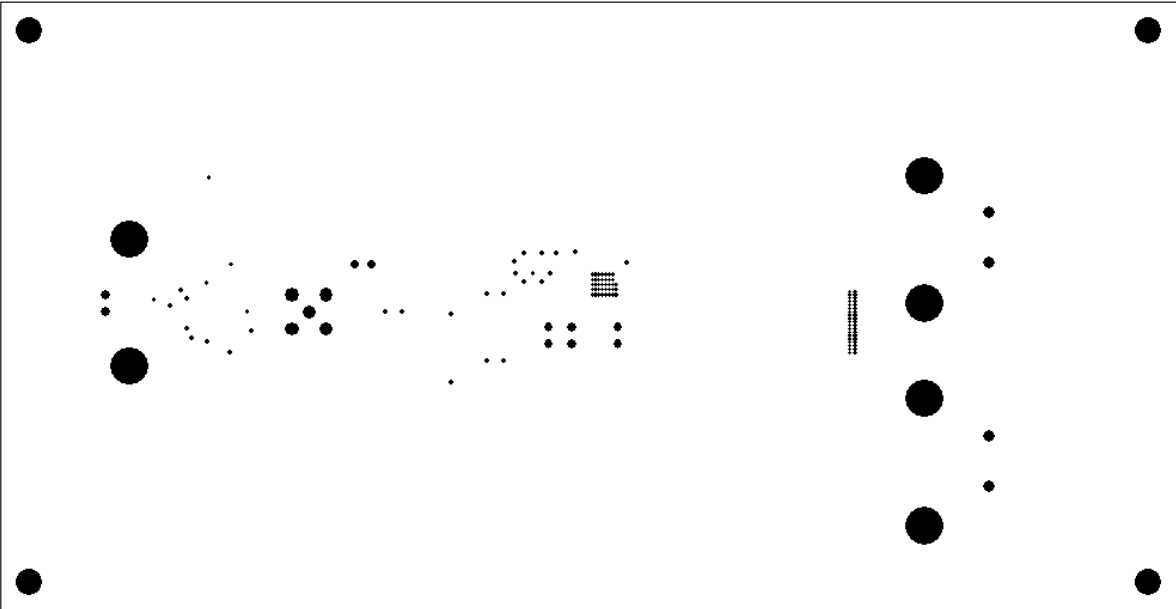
EPC7C020/EPC7011L7 Boost Evaluation Board Drill Pattern.
